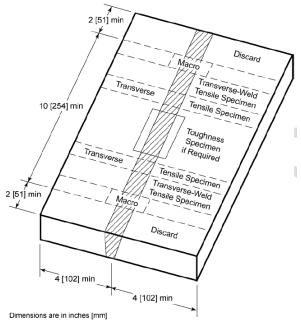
Location of Square Groove Weld Test Specimens—Plate [3]
